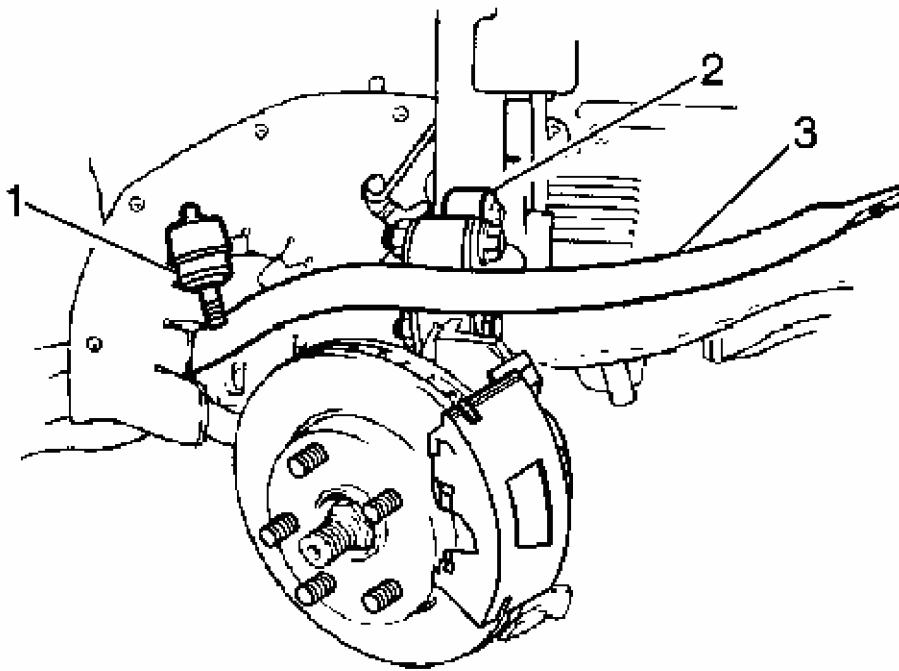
Guiding Stabilizer Shaft In/Out Left Side Of Vehicle
